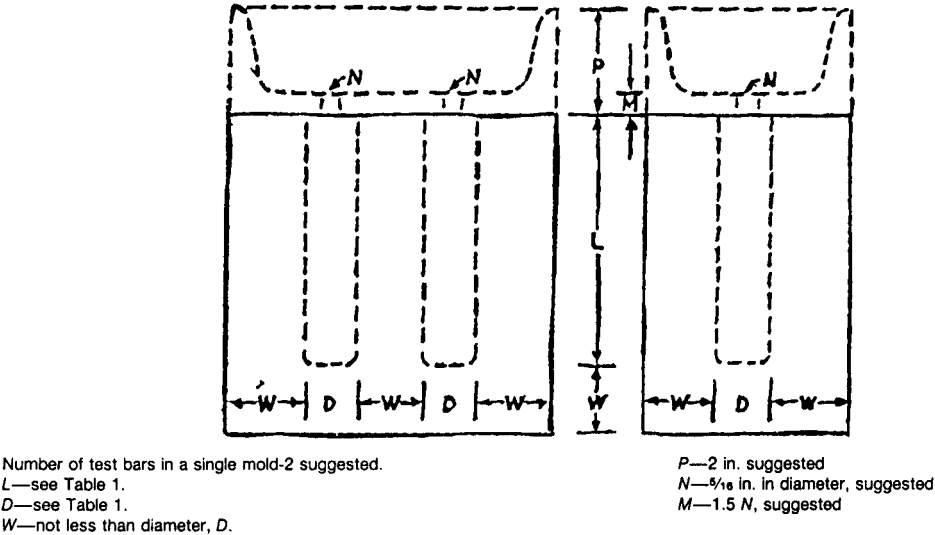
SUITABLE DESIGN AND DIMENSIONS FOR MOLD FOR SEPARATELY CAST CYLINDRICAL TEST BARS FOR GRAY IRON
